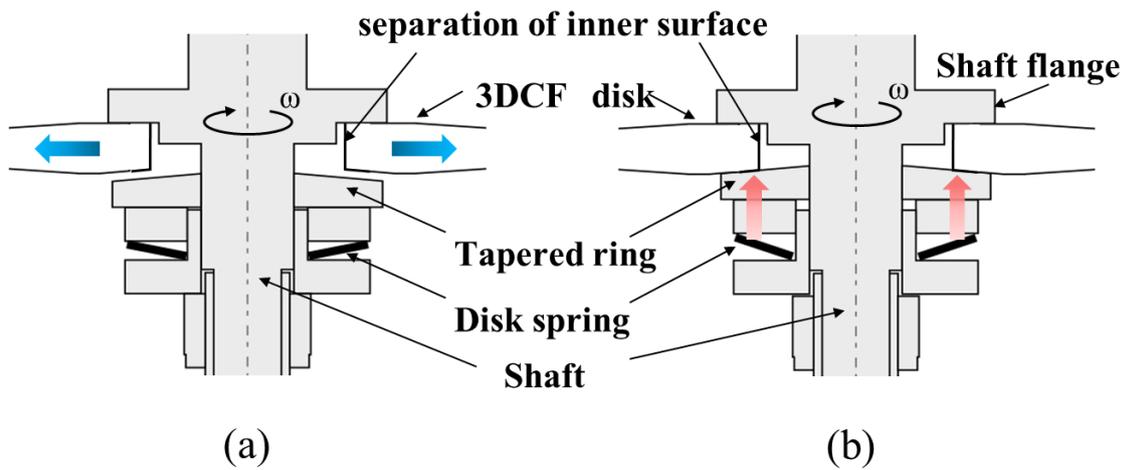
Tapered ring operation at high-speed rotation: (a) separation of inner surface of the disk from the shaft, and (b) disk caught between tapered ring and shaft flange by thrusting motion of tapered ring with spring disk.
